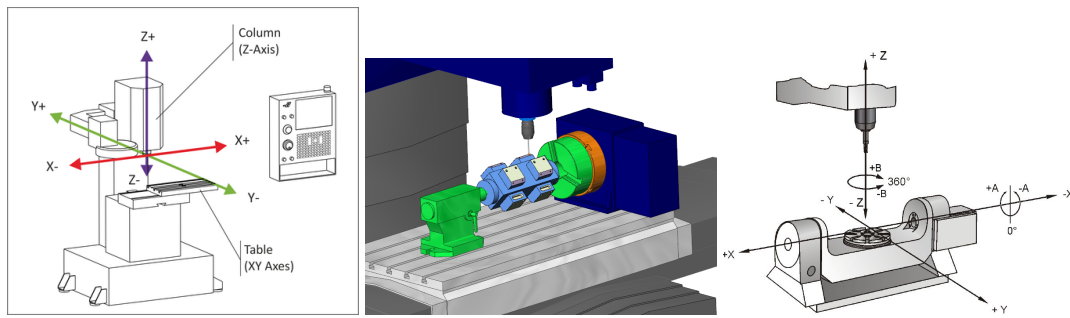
Axes of operation for 3/4/5-axis cnc machines[1][2][3]
